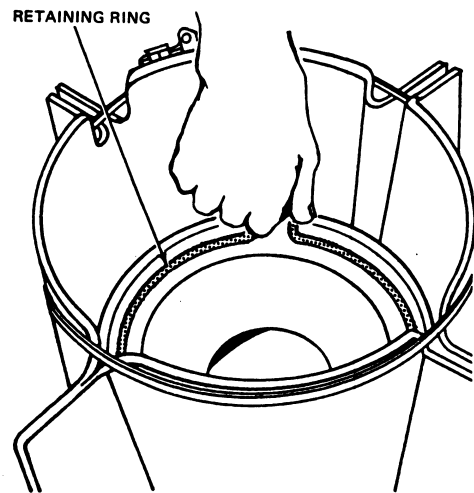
Removal of retaining ring by squeezing ears of ring.
